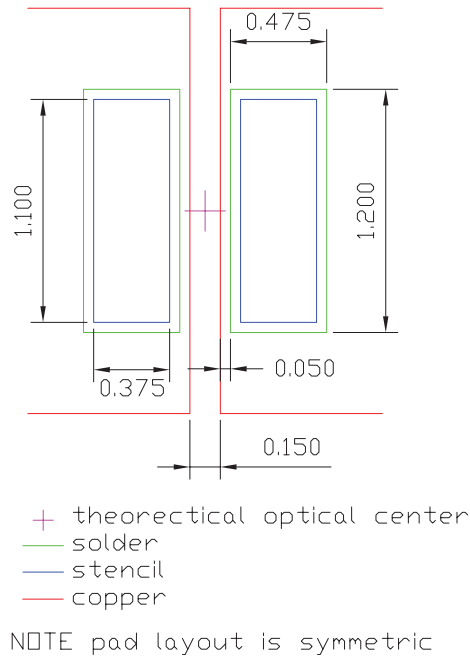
Recommended PCB solder pad layout for LUXEON Rubix.
